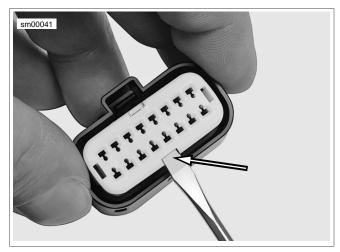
Molex Connector: Secondary Lock Pry Slot (Socket Housing)
